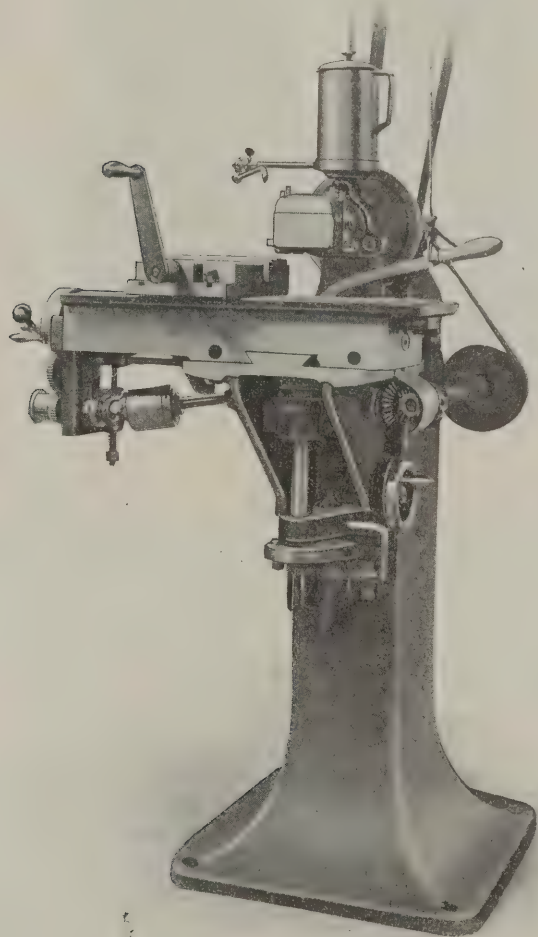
Sloan & Chace Automatic Rack Cutter.
